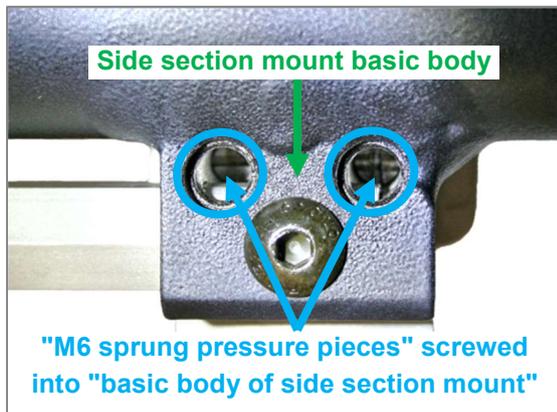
"M6 sprung pressure pieces" screwed into "basic body of side section mount" (view from inner side of product)
